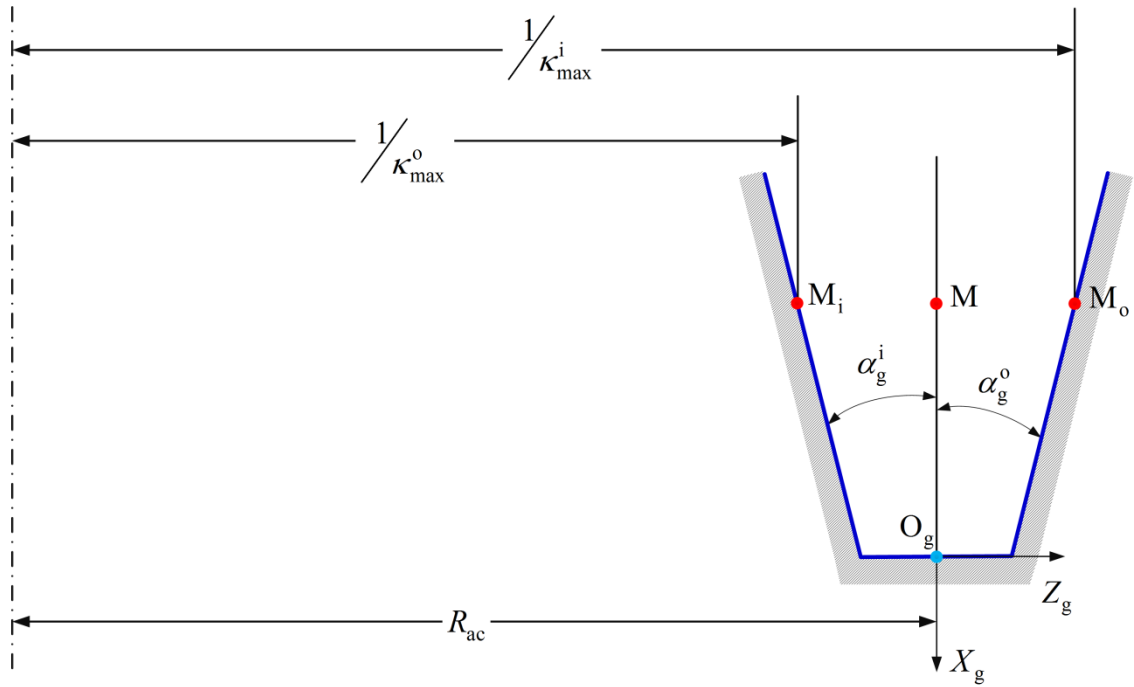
Illustration of determining the average cutter radius and the tooth cutting edge pressure angles of the inside and the outside blades.
